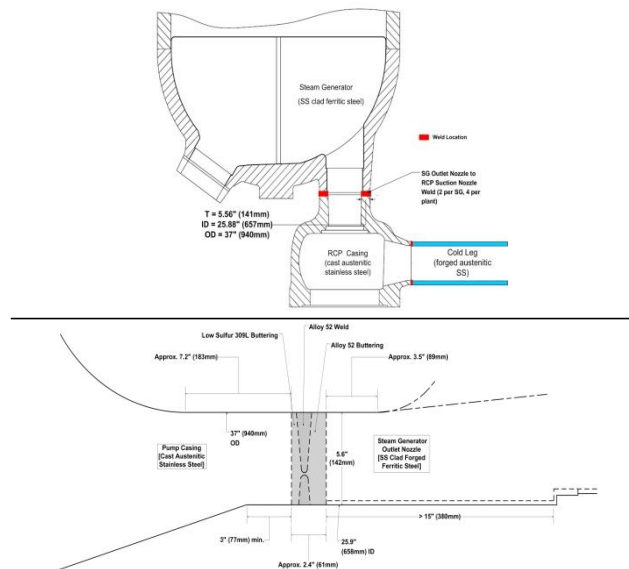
Steam Generator to Reactor Coolant Pump Casing Weld Configuration
